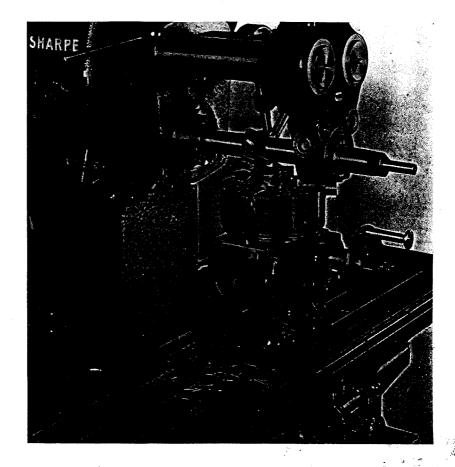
A typical rotary milling job using a No. 0 Universal Milling Attachment and 18" Rotary Attachment. The work is located radially by a special stud in the center of the Rotary Attachment table and is held by the vise as illustrated.
